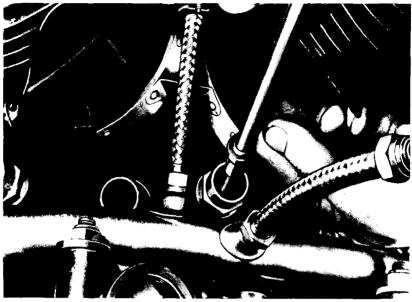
Removing Valve Tappet Ball Socket and Spring
